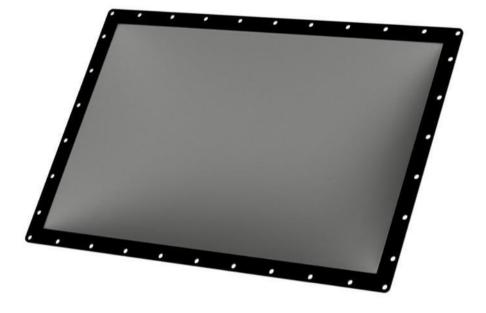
Integrated seal of Vent PRO S - bottom side
